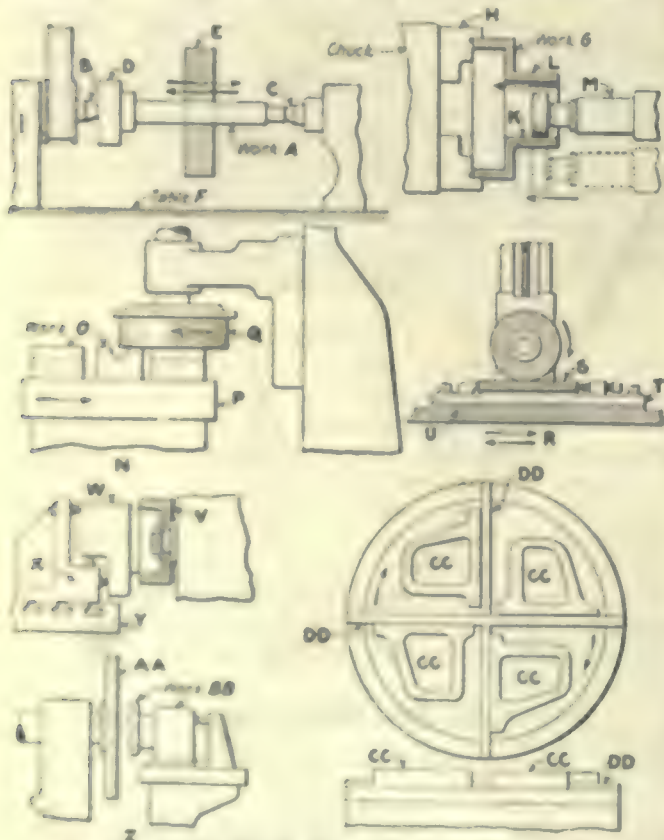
EXAMPLES OF GRINDING OPERATIONS
